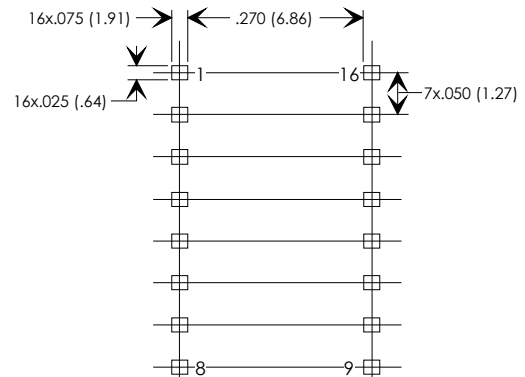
RECOMMENDED PCB LAYOUT DIMENSION IN INCHES, (mm)
